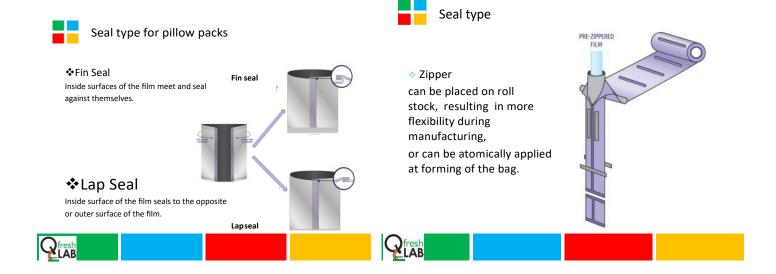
Ilapak: Packaging equipment https://www.ilapak.com/
